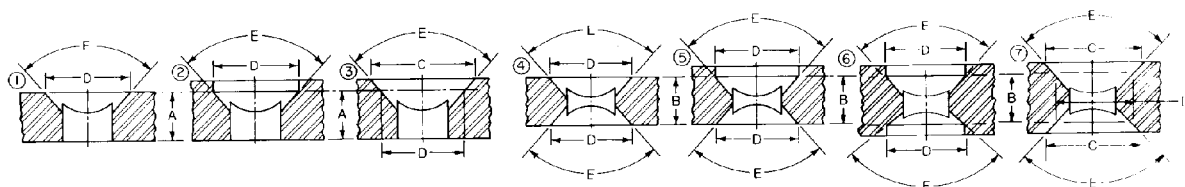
CROSS SECTION DRAWINGS 1 THRU 7
